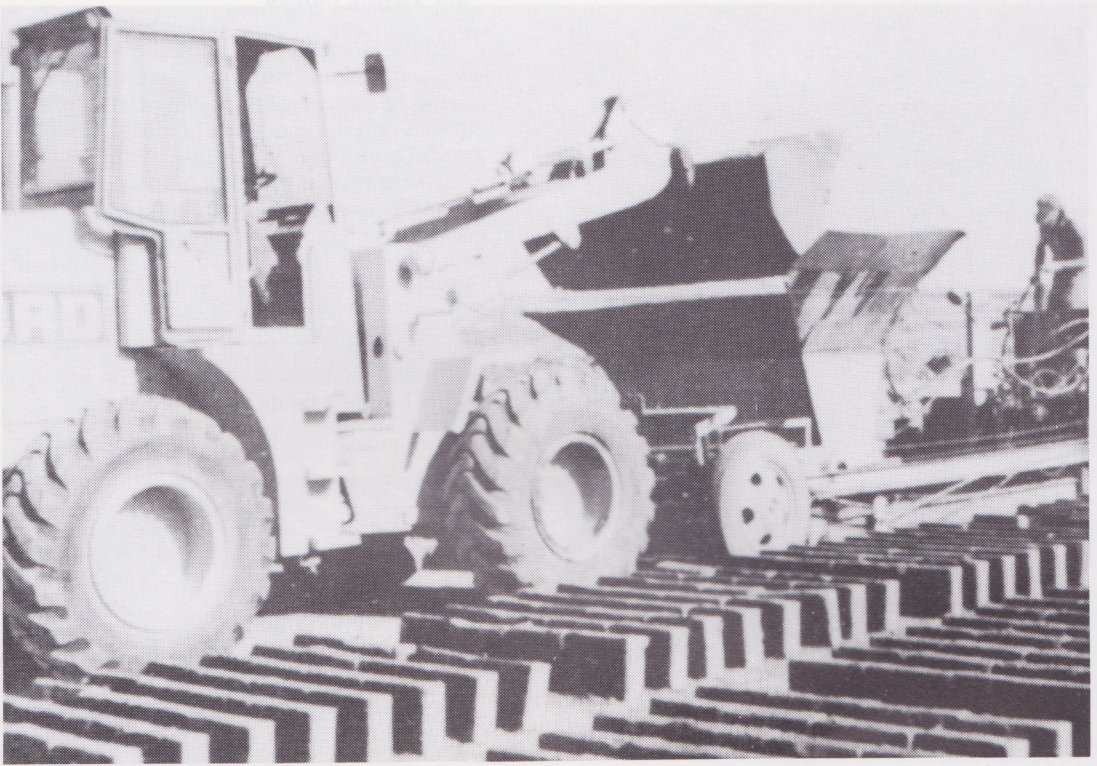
Mechanical moulding of adobe blocks in New Mexico
